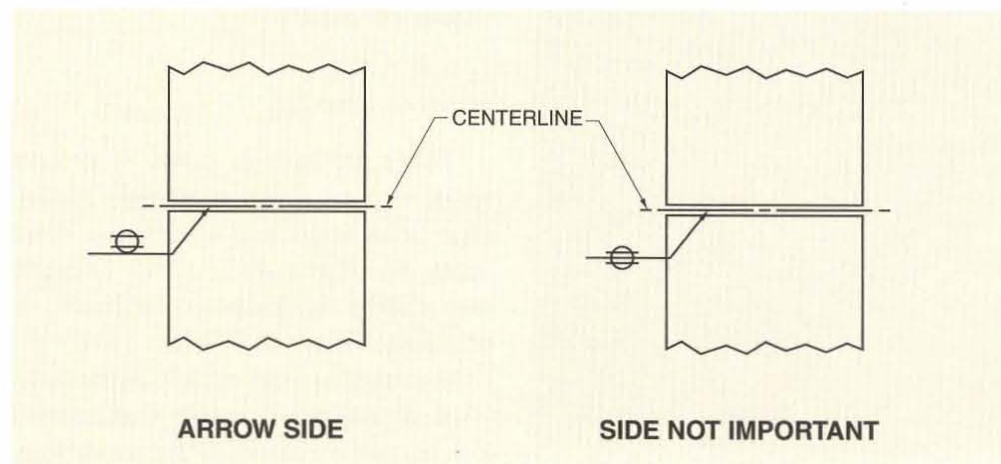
For a seam weld symbol, the arrow is run to the centerline of the weld seam, with the appropriate symbol above or below the reference line. If side is not important, the symbol is placed astride the reference line.
